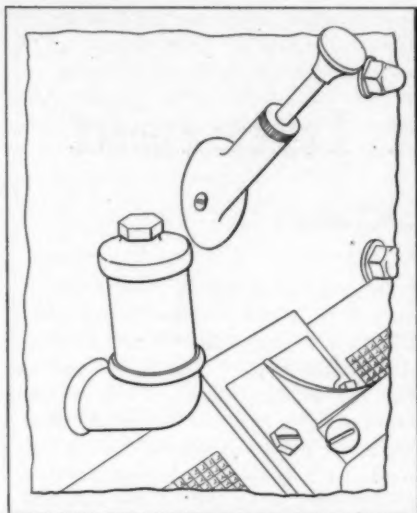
Type of sight feed oiler used on 1912 Premier cars, located near the base of the steering pillar
